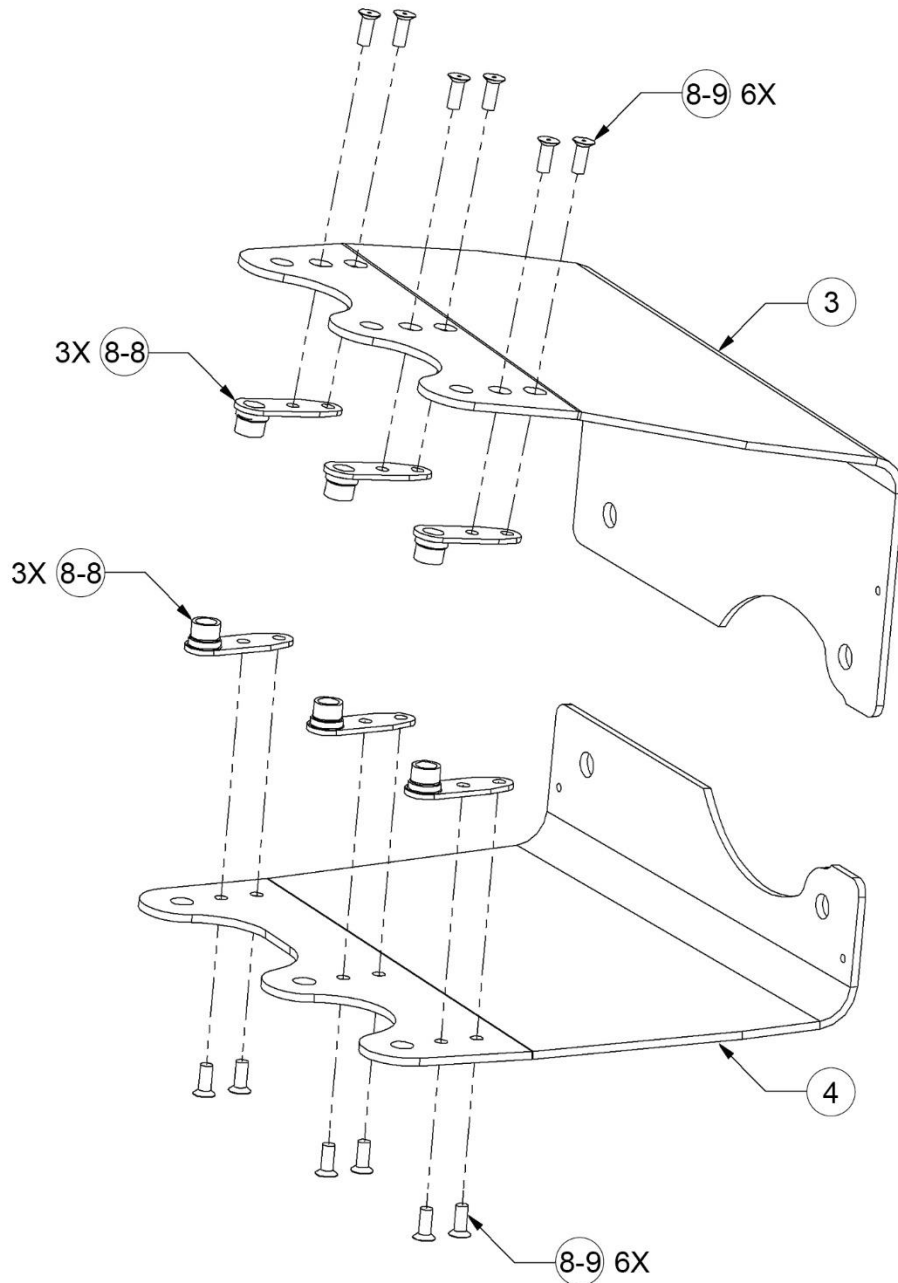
Attaching Nutplates to Upper and Lower Roll Servo Brackets
